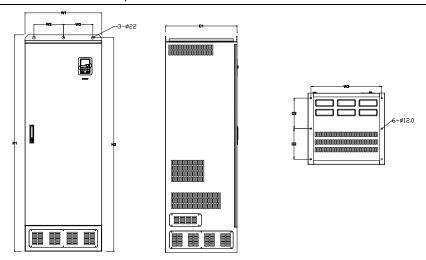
Floor installation of 660 V 400-630 kW VFDs
